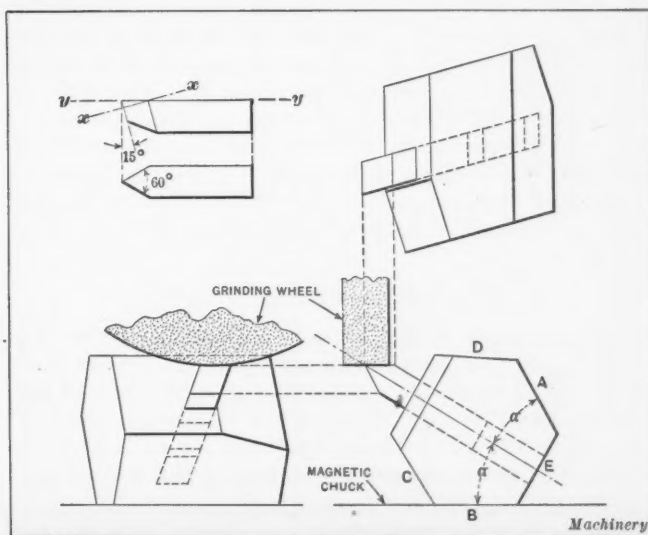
Showing Inclination of Sides of Holder Relative to Thread Tool
